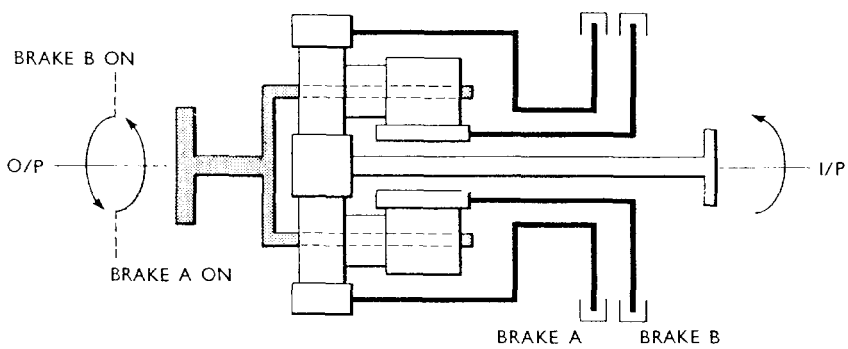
REVERSING EPICYCLIC GEARBOXES—ALTERNATIVE ARRANGEMENTS
